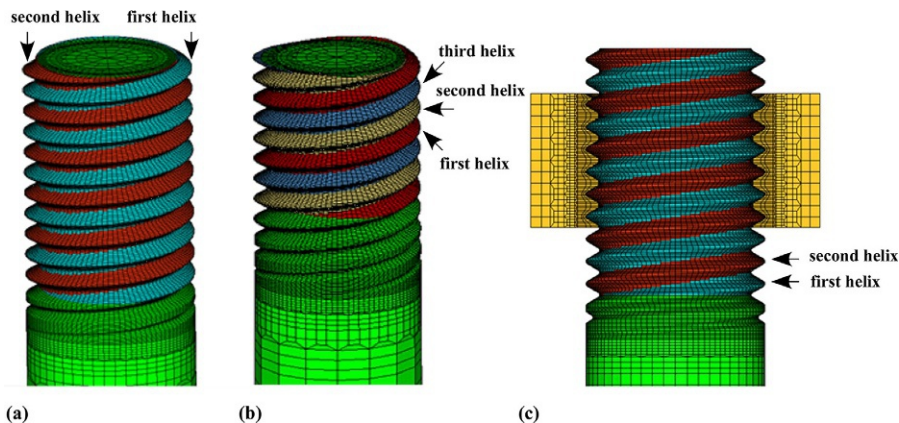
Helical thread models of double- and triple-thread screws. (A) Double-thread screw, (B) triple-thread screw, and (C) cross section of double-thread screw.
